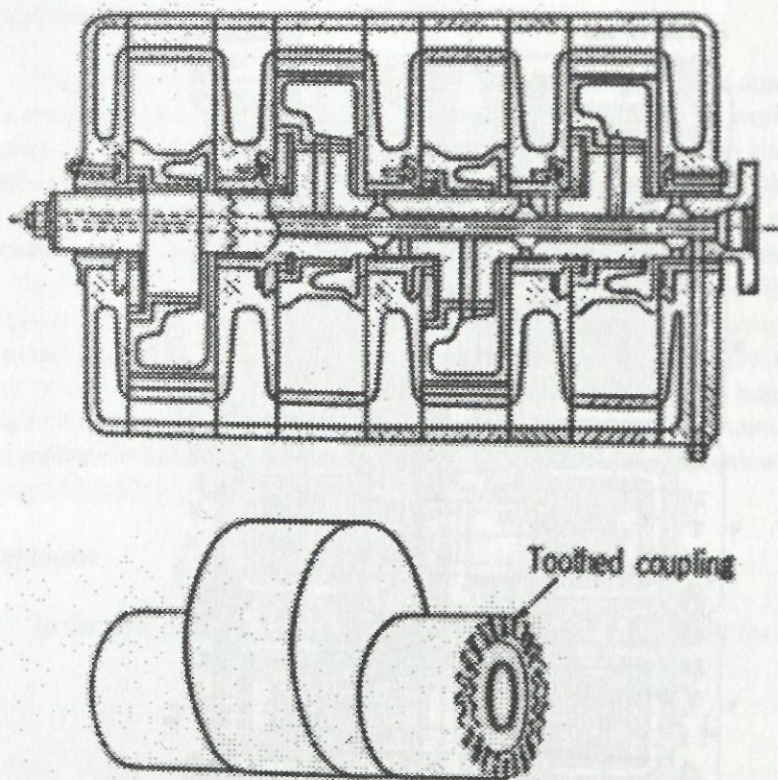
Example of a four rotor Wankel rotary engine with multi-section eccentric shaft
